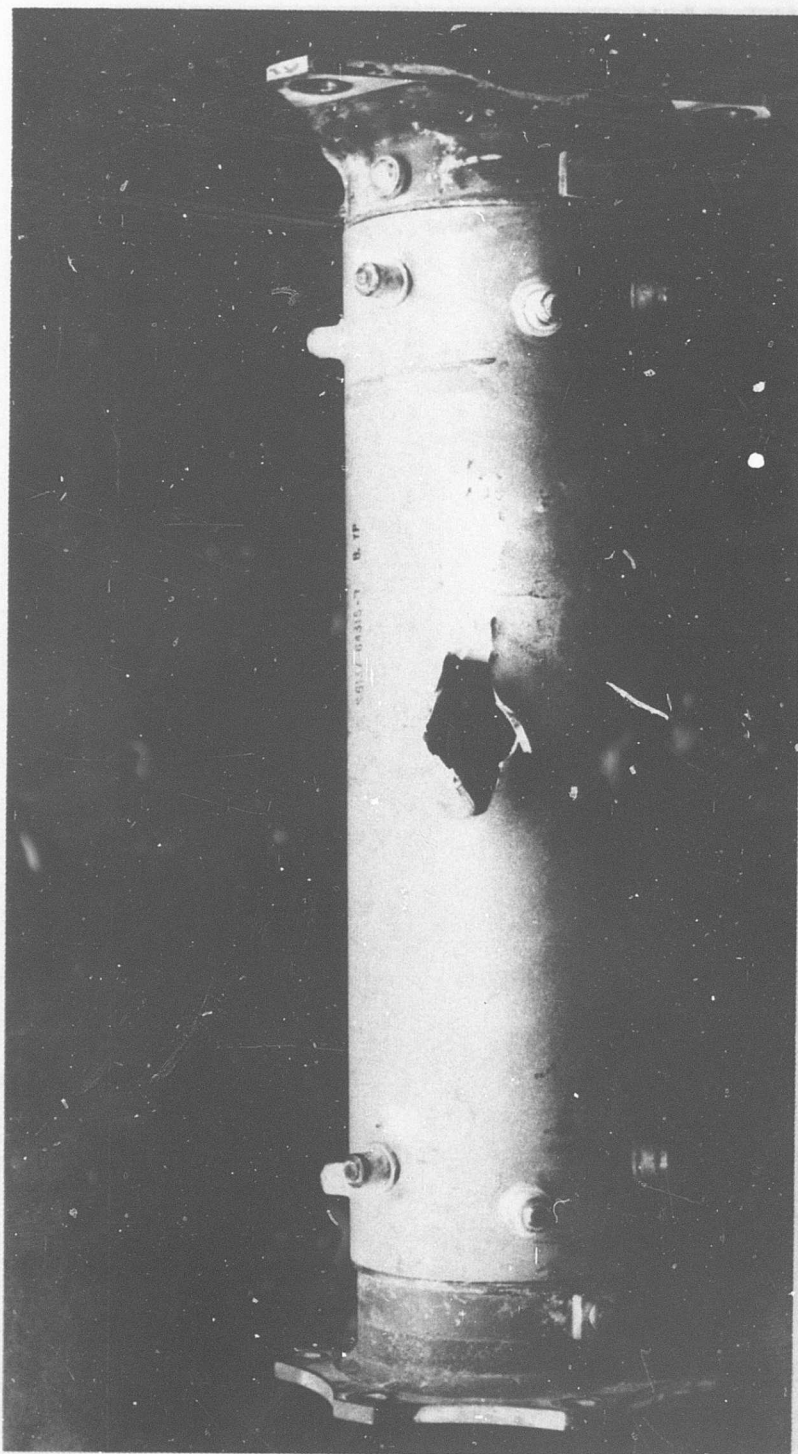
Aluminum Specimen 10, Exit Hole Damage.
